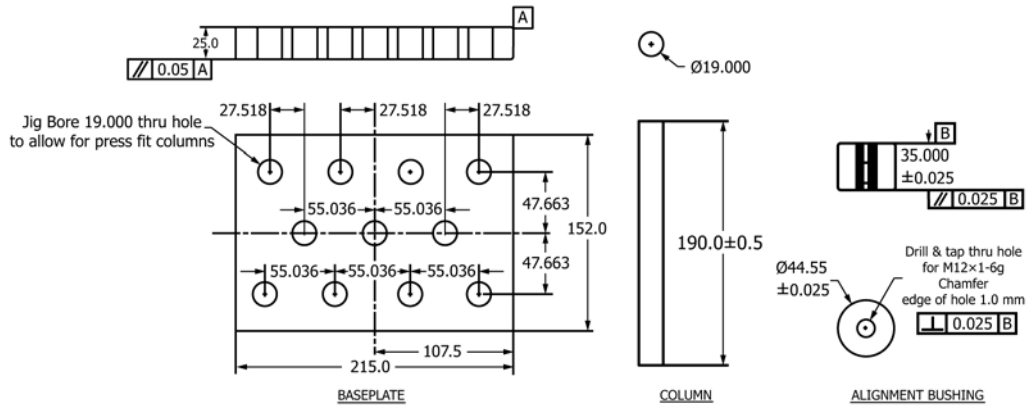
Drawing of Alignment and Bonding Fixture (SI units)
